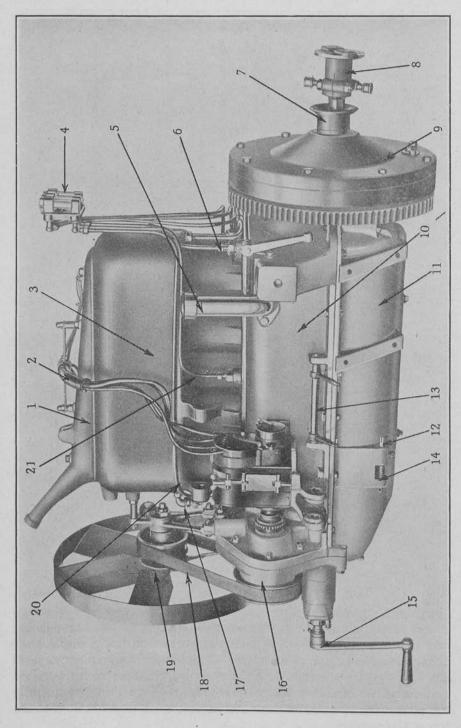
LEFT SIDE OF ENGINE	Ref. No. Part No. Name 1
